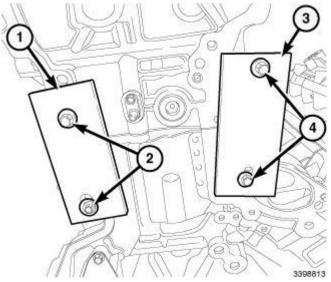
Cylinder Head Alignment Tools & Bolts Courtesy of CHRYSLER GROUP, LLC
